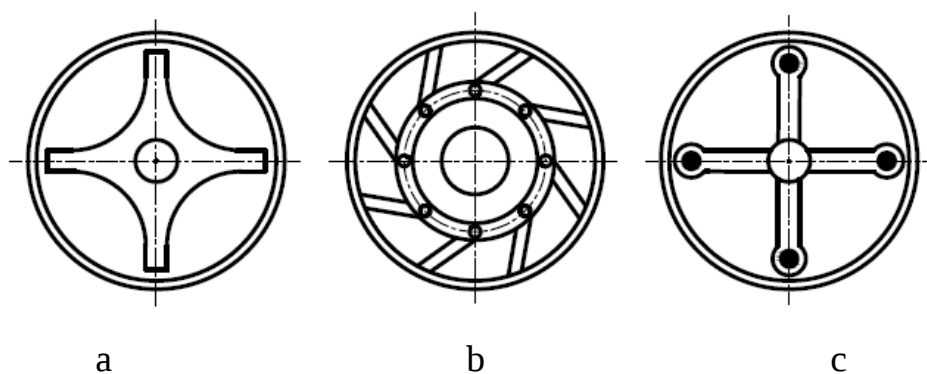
Rotary stirrers: a - rigid, b - with hinged attachment, c - with movable blades
